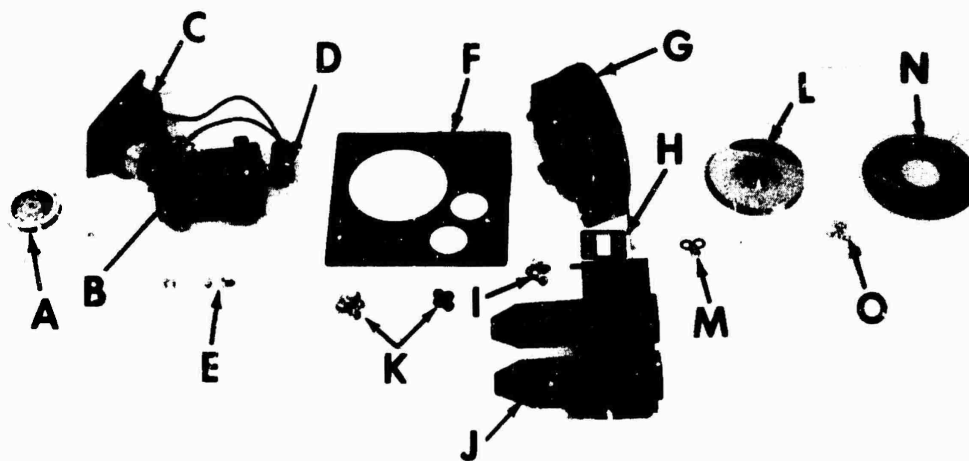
Motor-Precleaner Assembly, Facepiece Protector,
